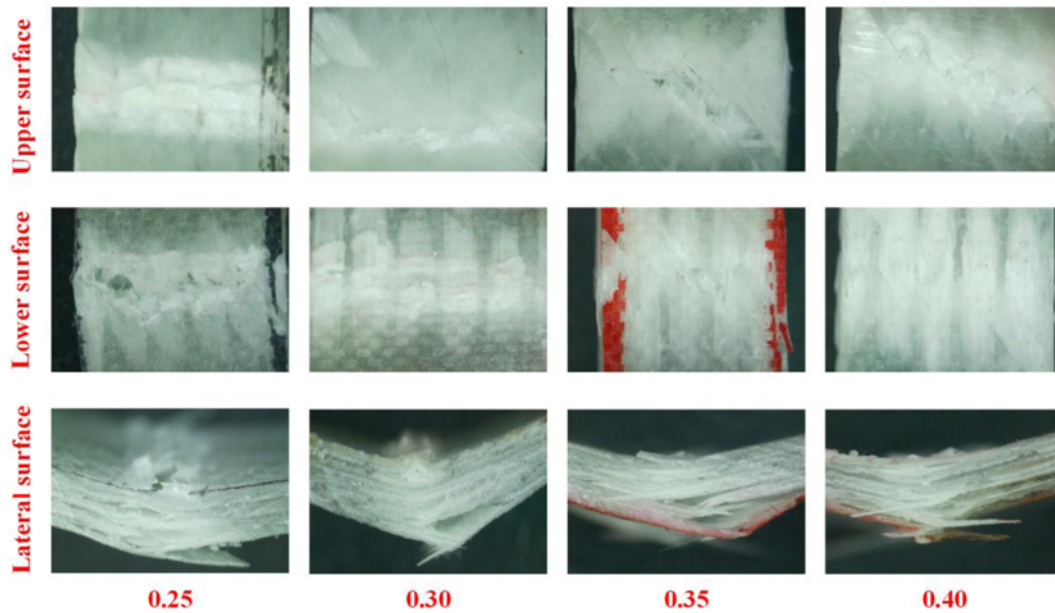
Bending fracture morphology of the specimens in 0° direction.
